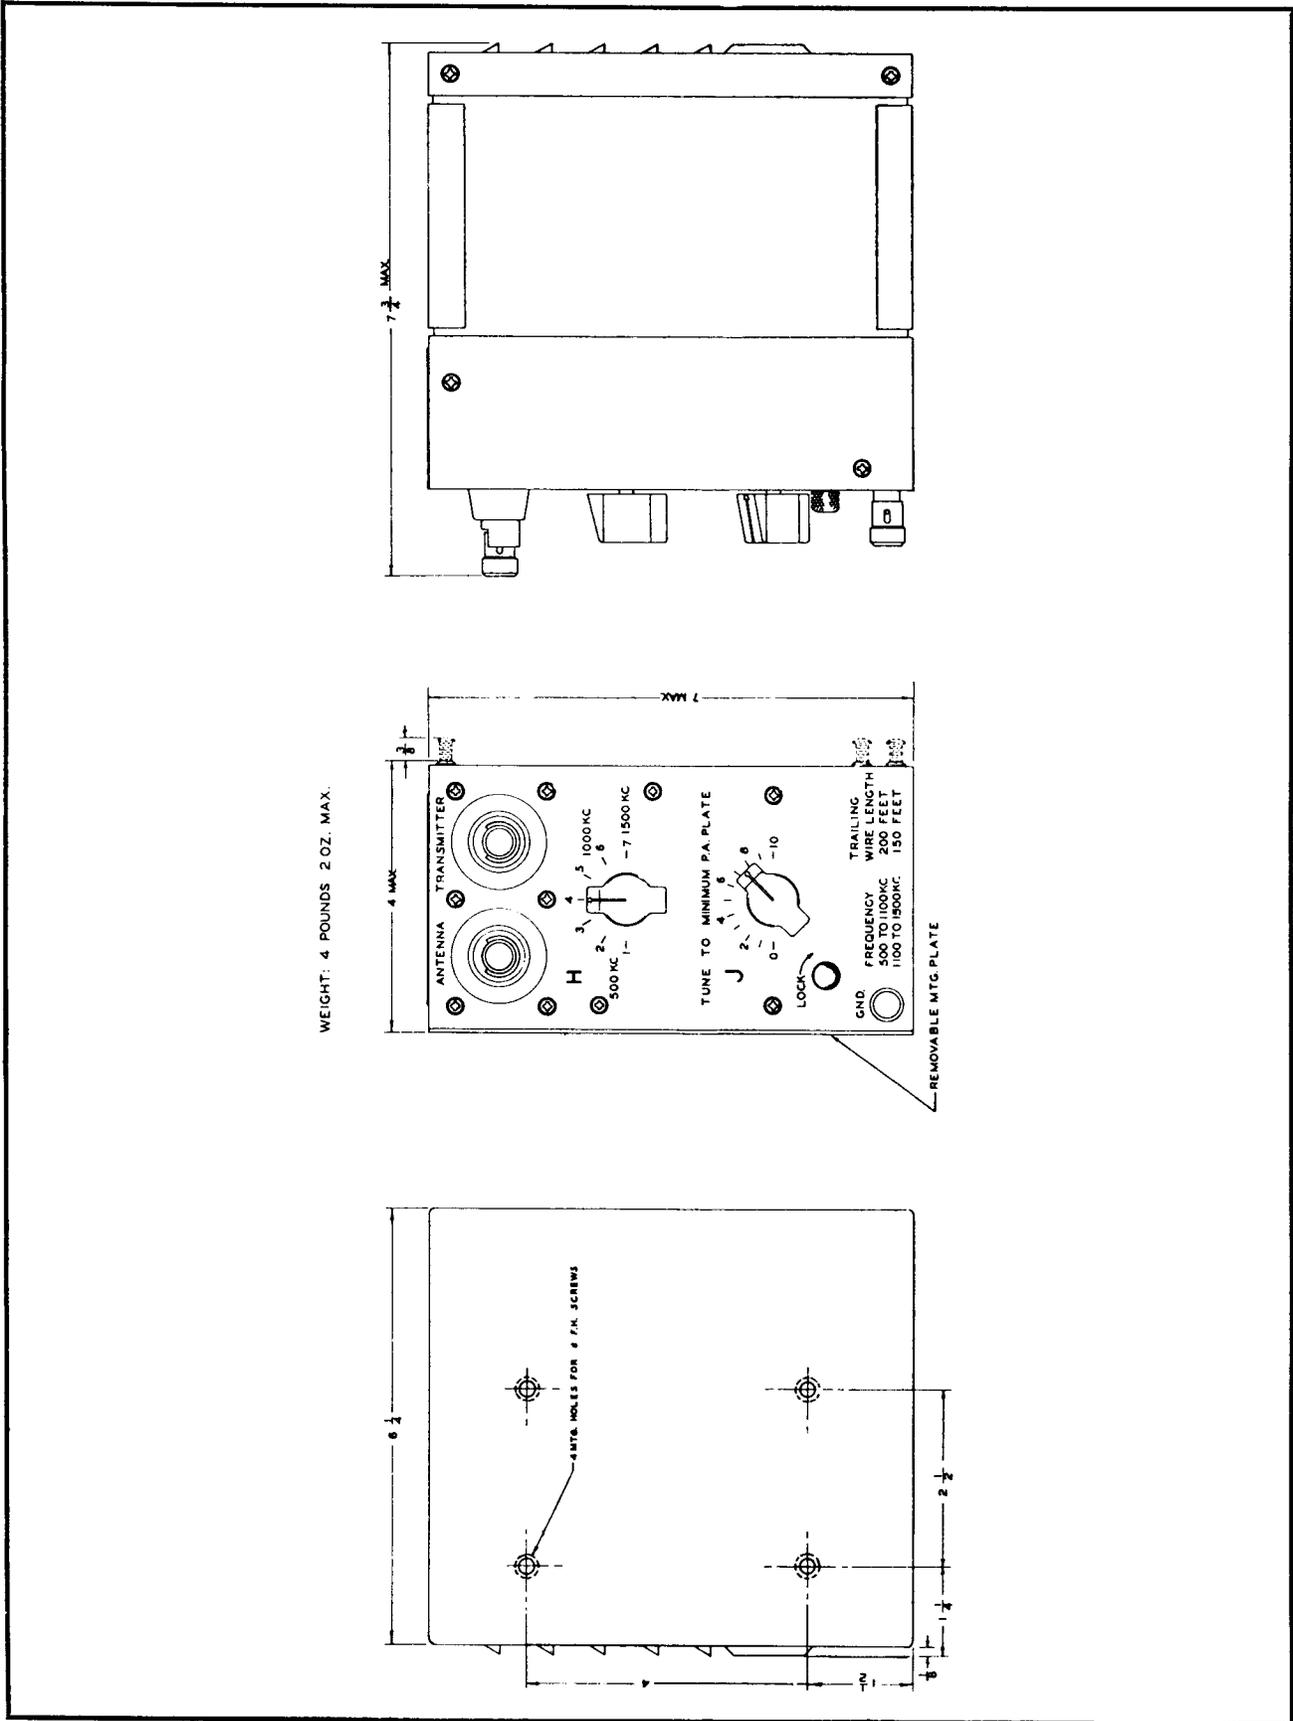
Antenna Loading Coil CU-26/ART-13 with Mounting Plate MT-162/ART-13 (Navy Type -47282)—Outline Dimensions
